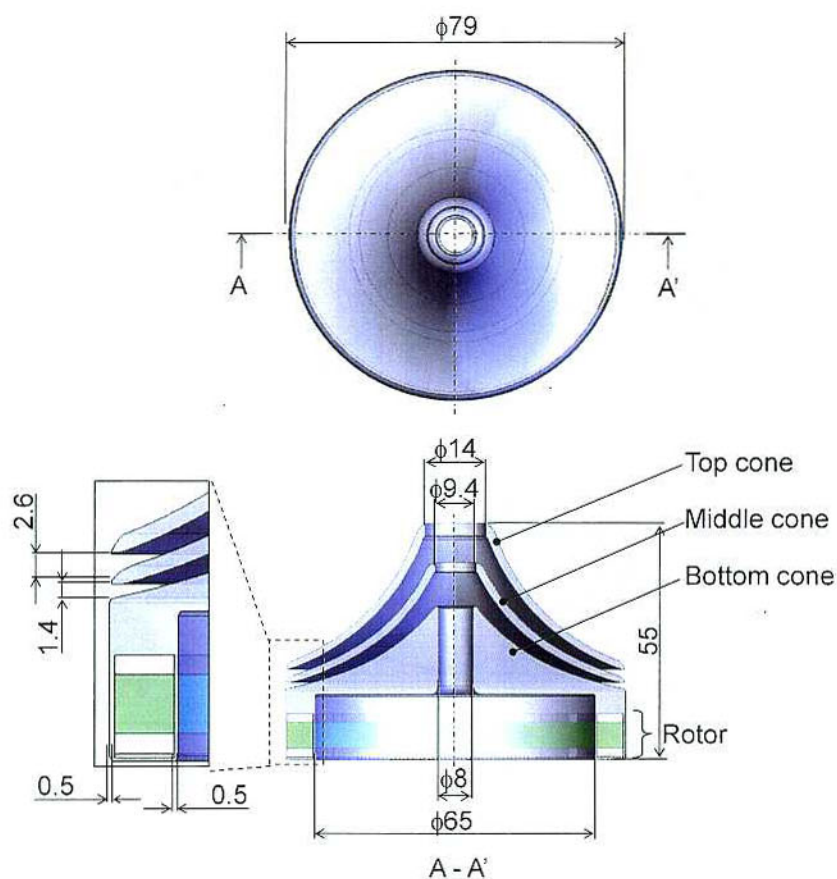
Dimensions of the cone-shaped impeller utilized in the proposed pump
